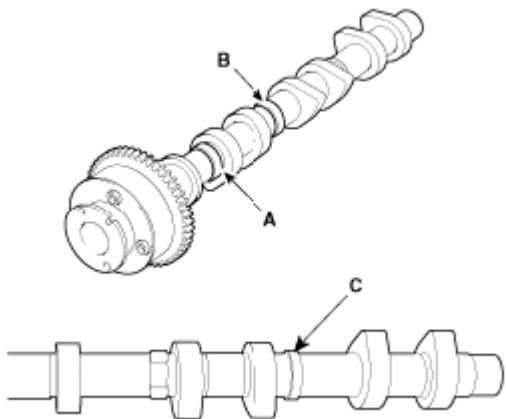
Identifying Exhaust Camshaft Outer Diameter
